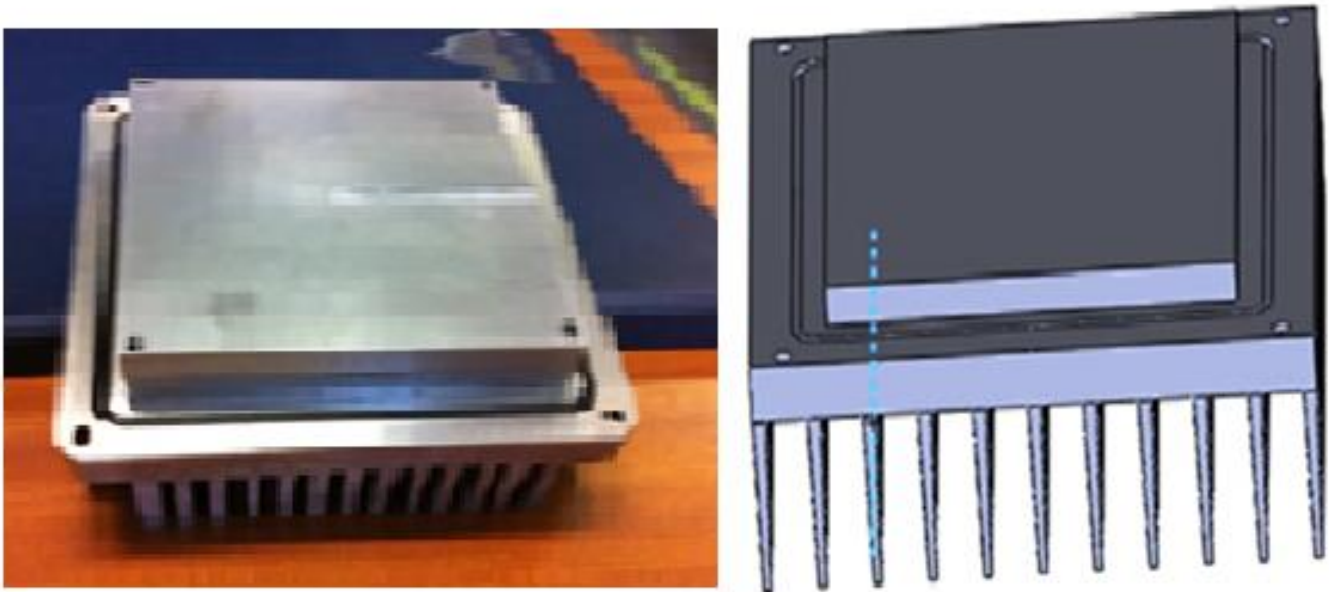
The photograph of the fabricated heat sink (left) and its design drawing (right).
